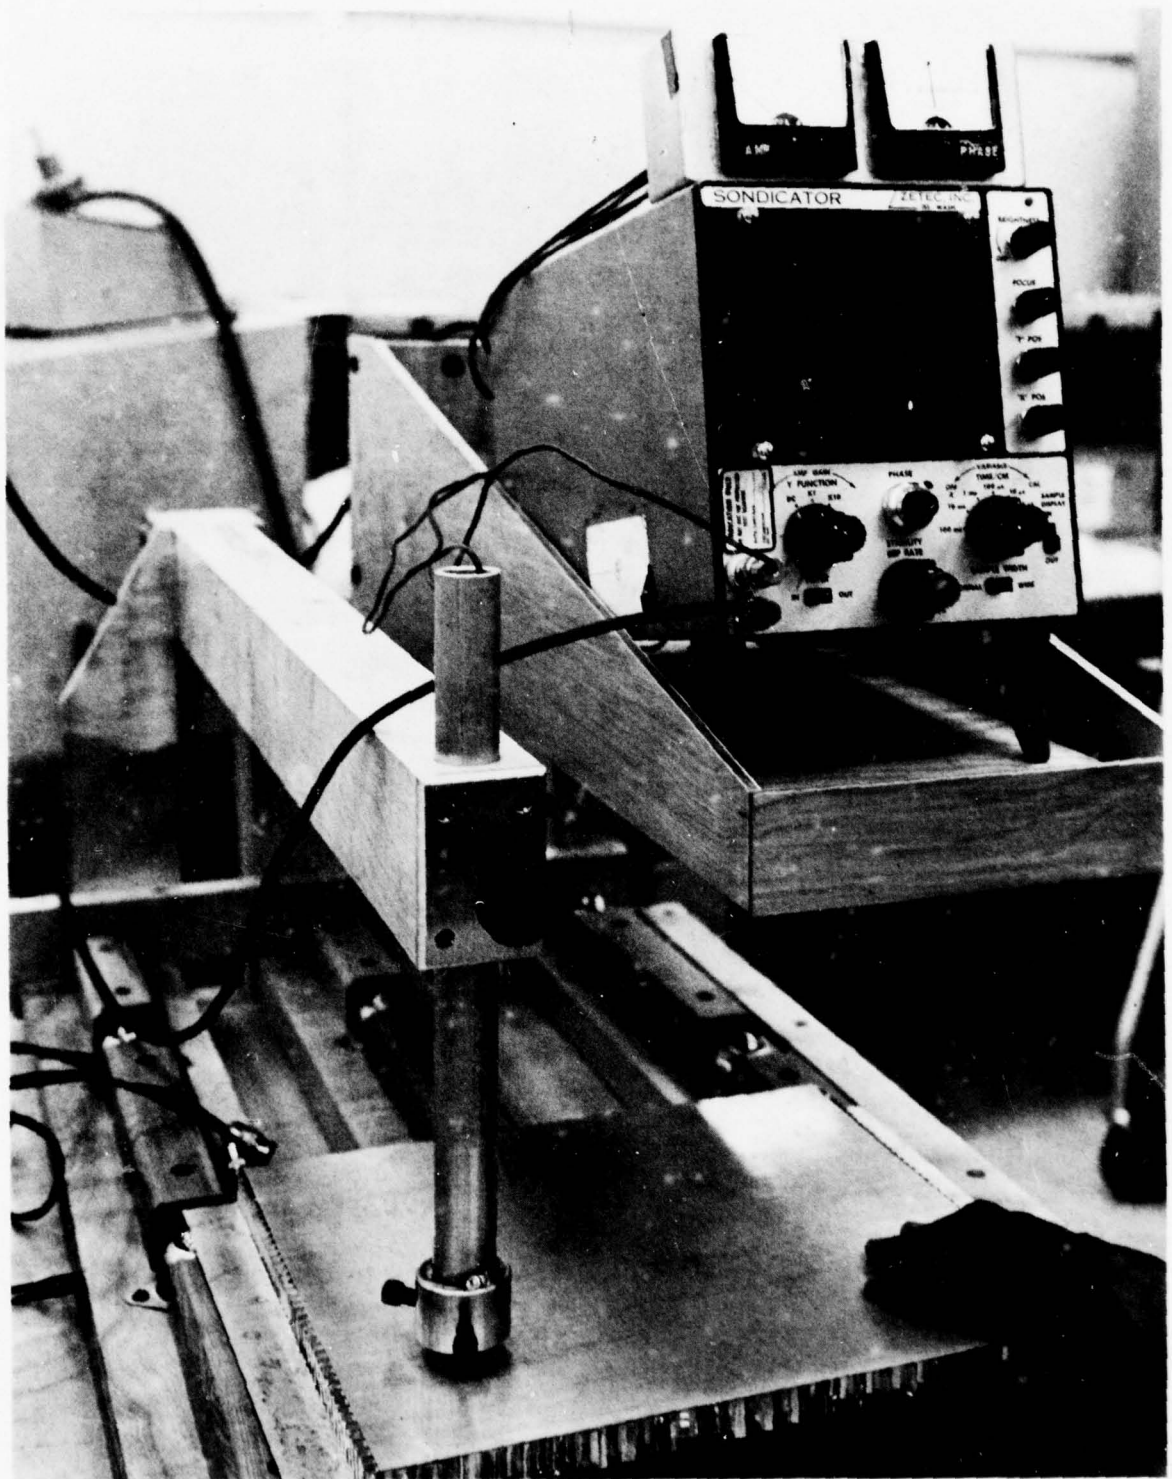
The Sondicator Being Used to Inspect Honeycomb Panel by Through-Transmission
